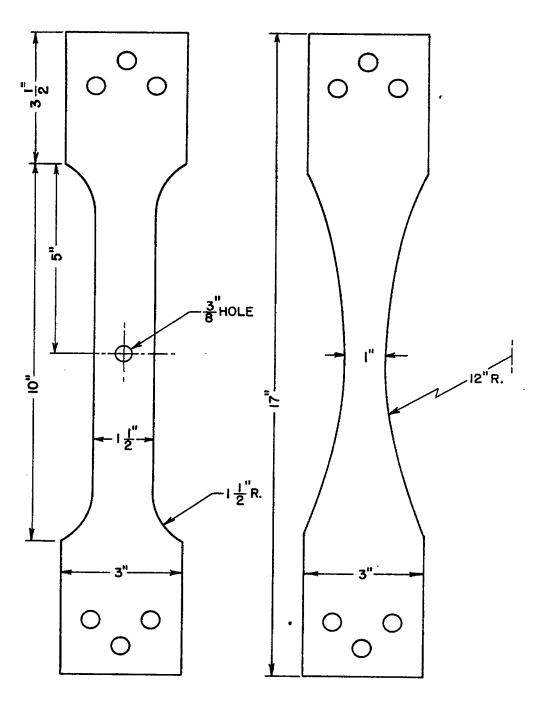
FATIGUE TEST SPECIMENS USED AT BATTELLE FOR AUXILIARY TESTS.
